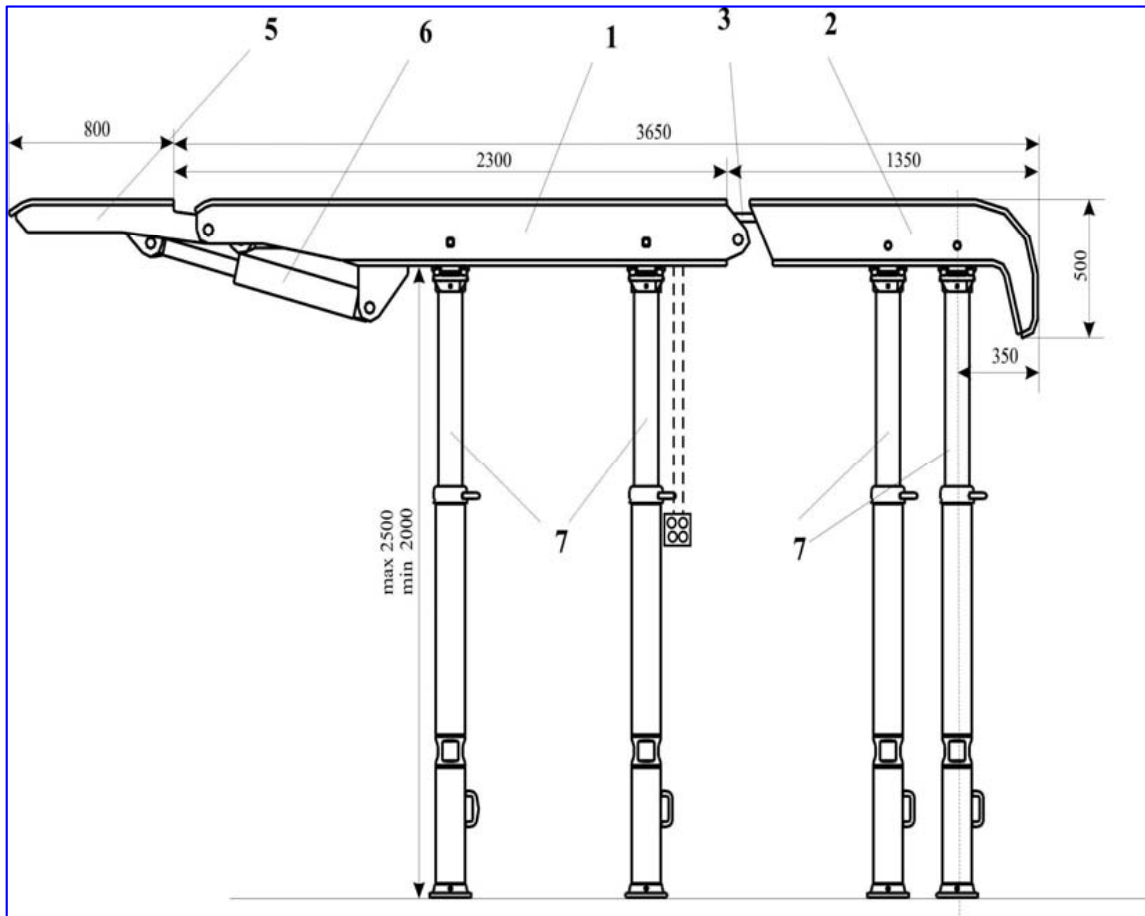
GEROM GP 250/1200 stepping frame: 1-main frame; 2-secondary frame; 3-gliding element; 4-hydraulic stepping cylinder found inside the frame (1.2); 5-front catcher; 6-front catcher hydraulic cylinder; 7-hydraulic props.
